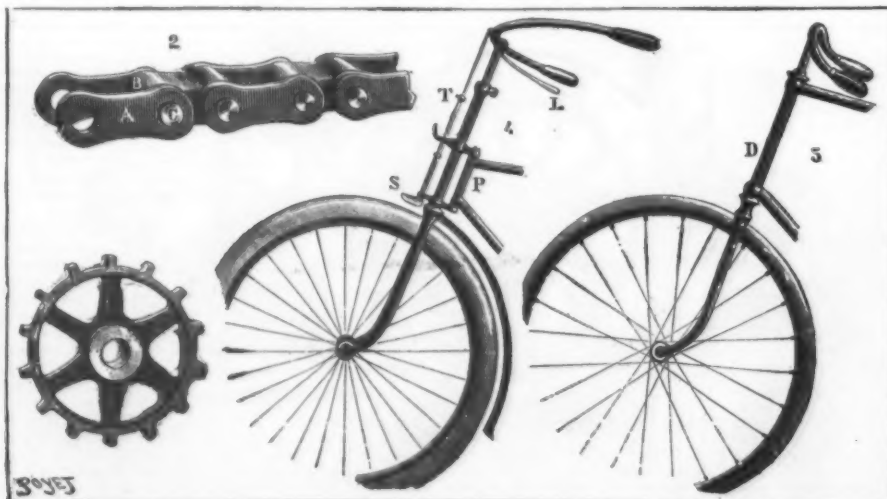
DETAILS OF THE MECHANISM OF A BICYCLE.
